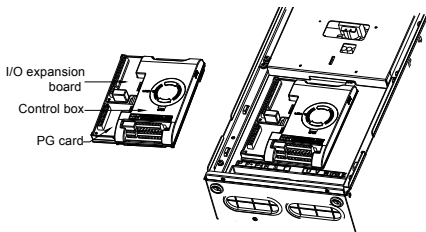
Schematic Diagram Of Assembly & Disassembly Of PG Card
